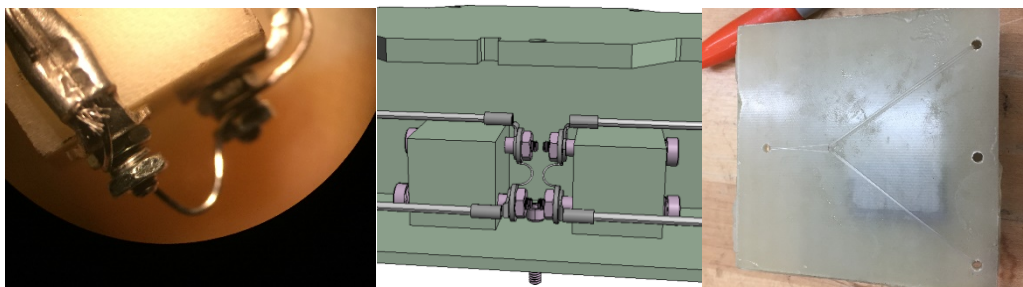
Left: Nichrome wire assembly. Middle: Diagram of nichrome wire assembly. Right: Dyneema thread assembly.
